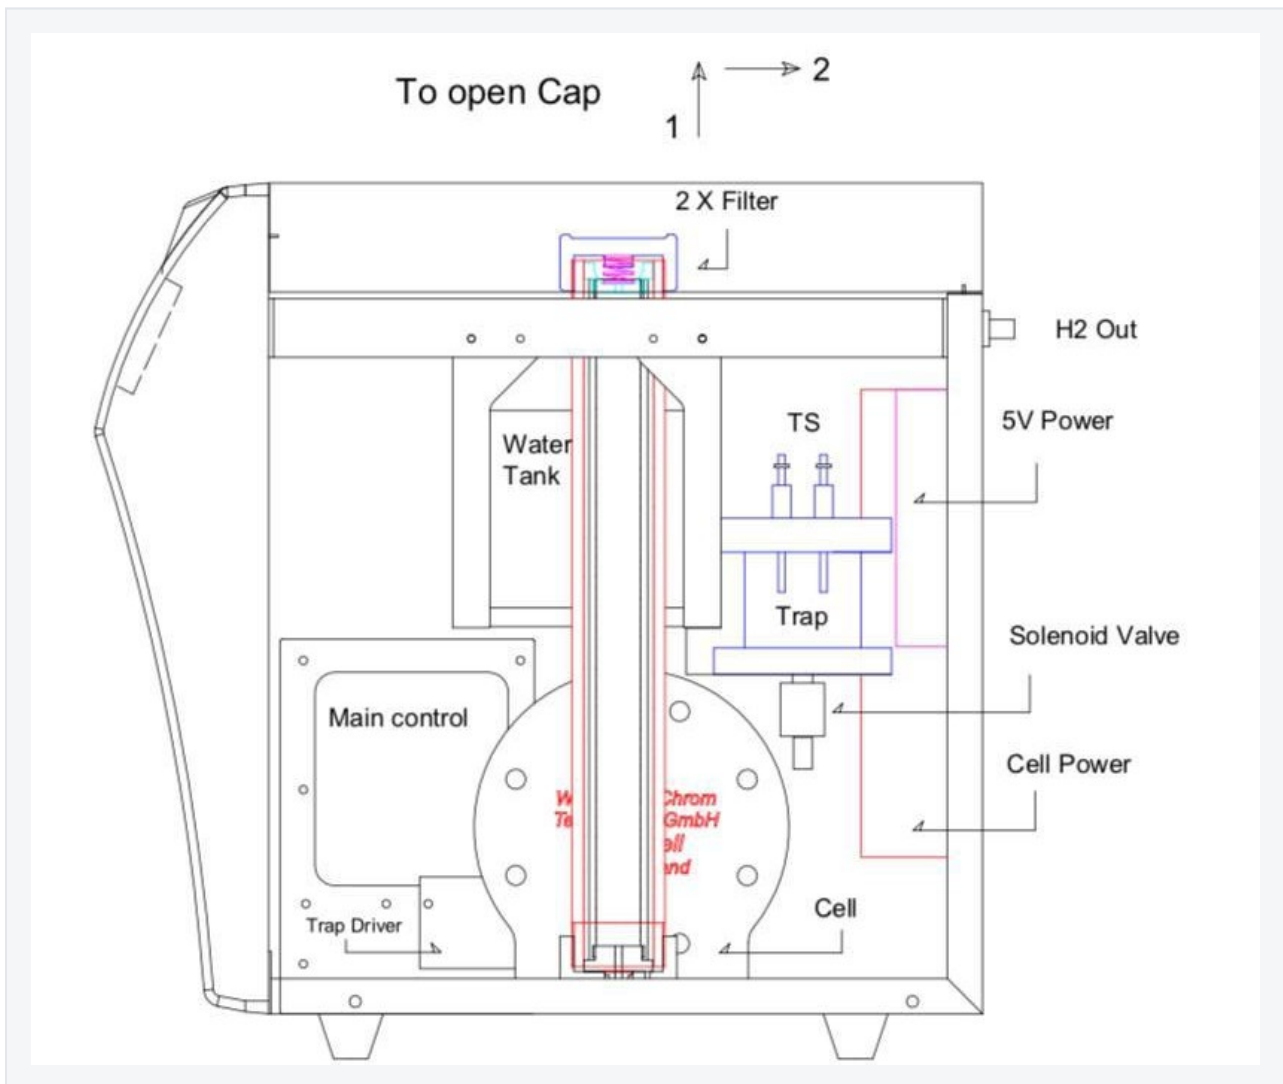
INTERNAL ARRANGEMENT, SIDE SECTION
